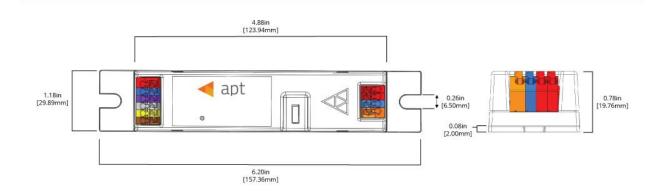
APT-CV2-Vx-LN Mechanical Drawing
